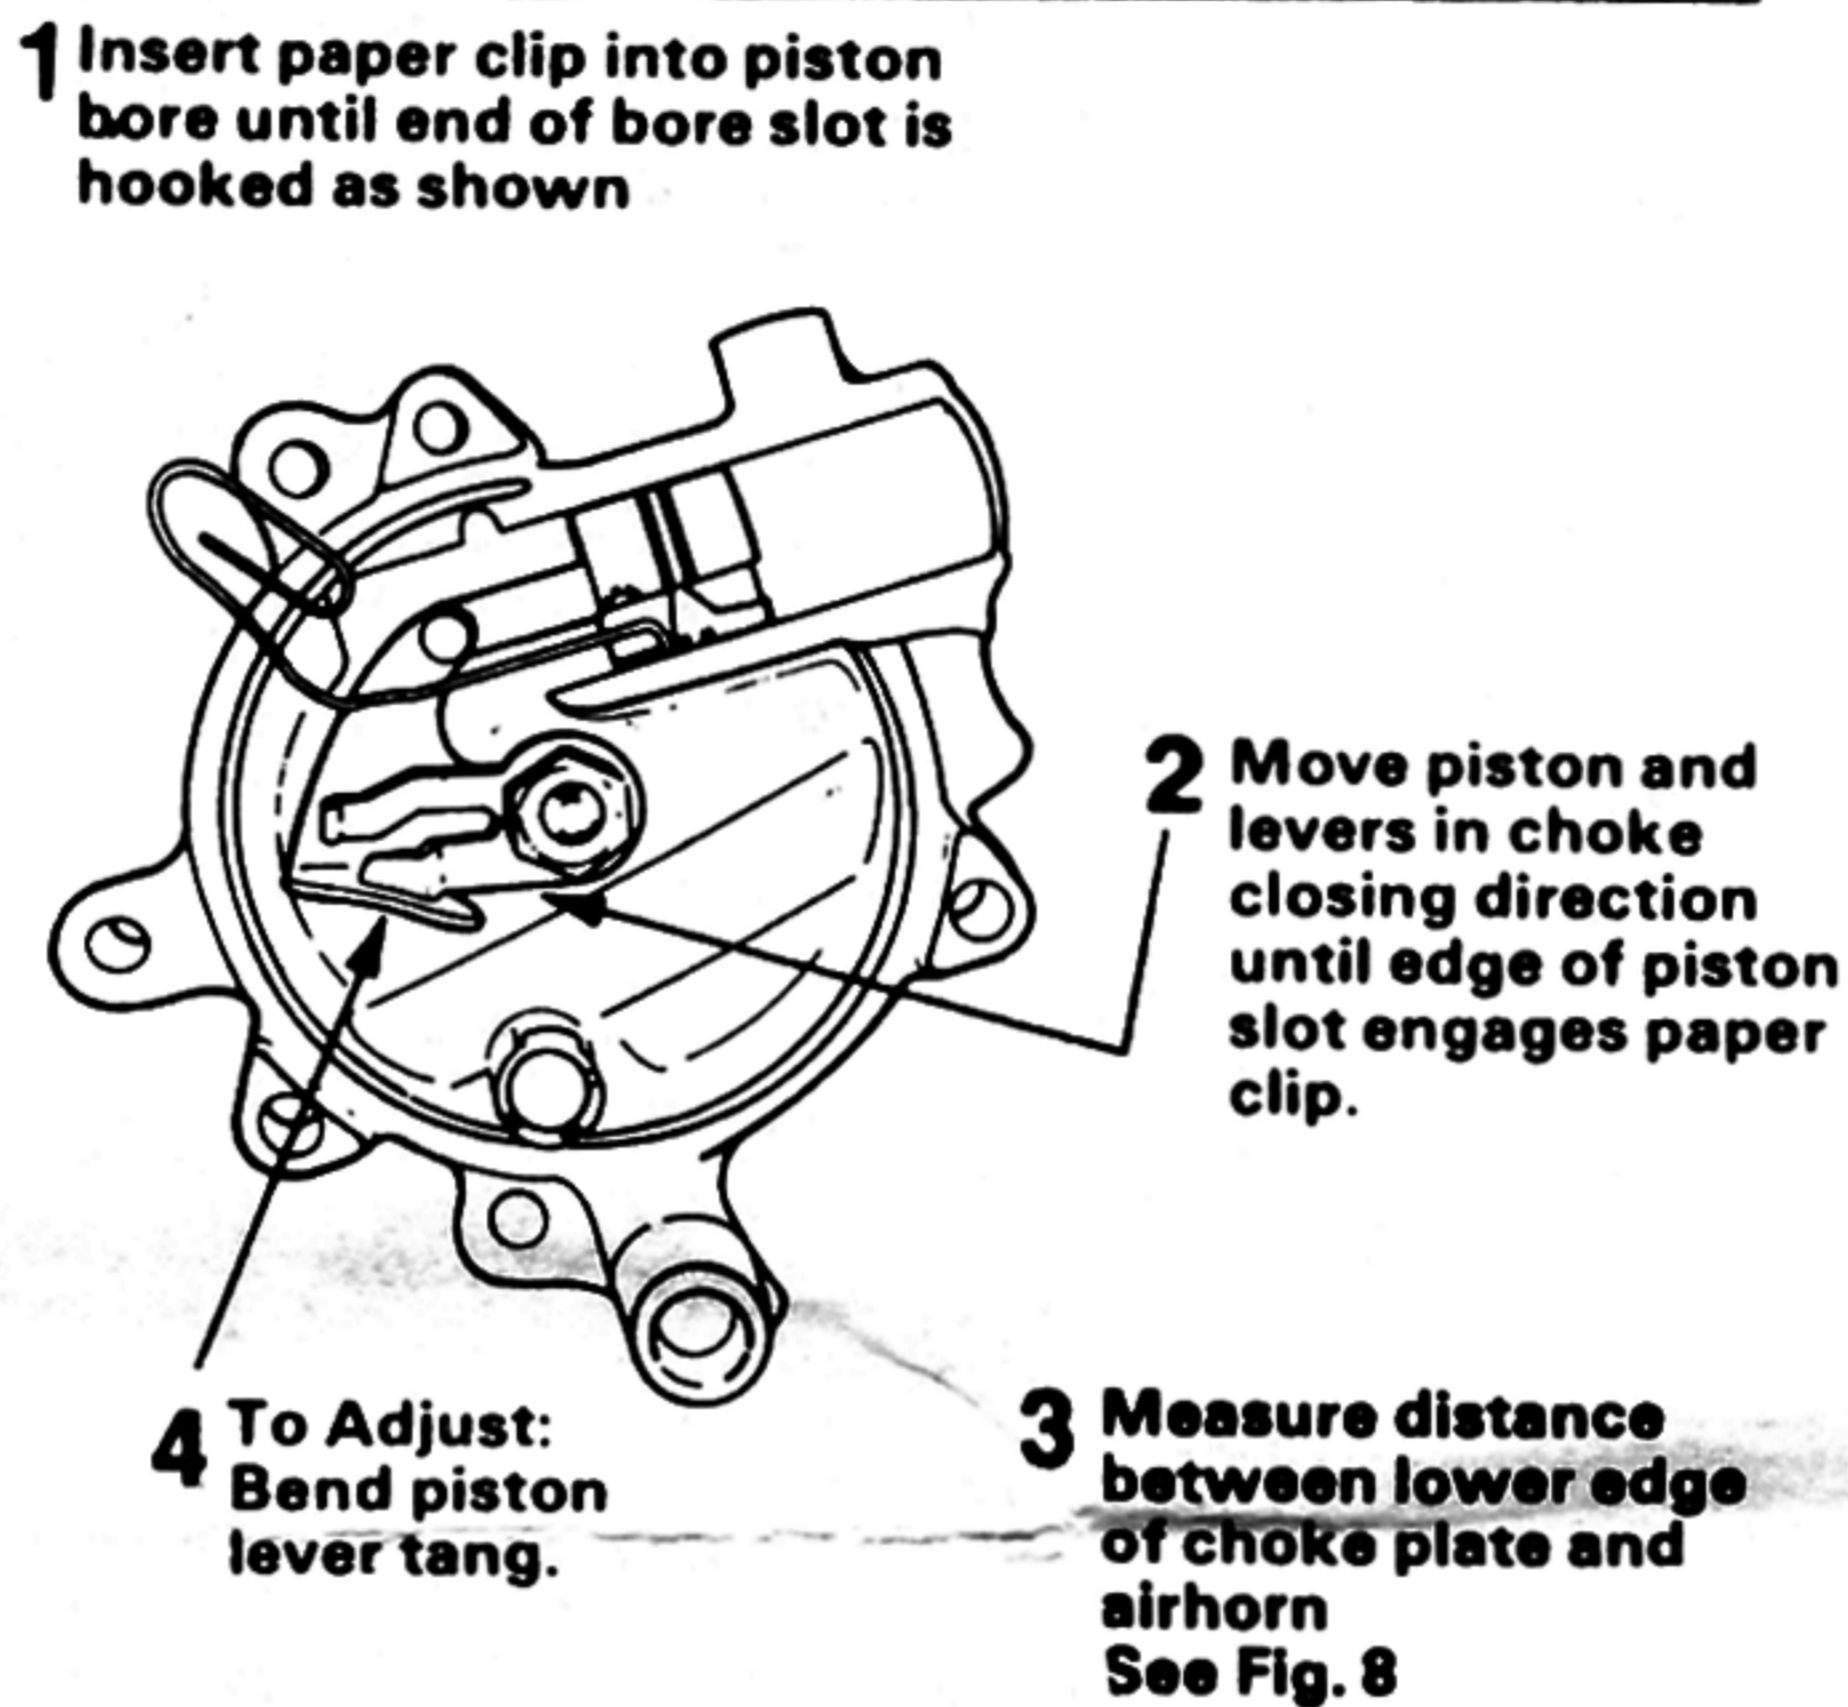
CHOKE QUALIFYING (INTEGRAL CHOKE) ADJUSTMENT
